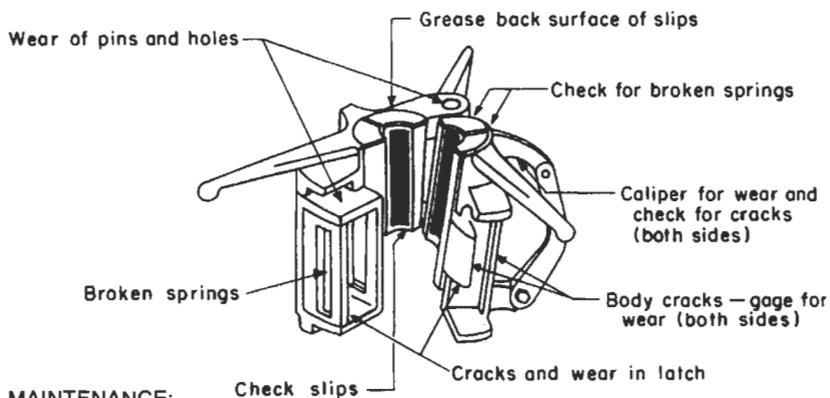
Casing, tubing, and drill pipe elevators, side door elevators [10].
